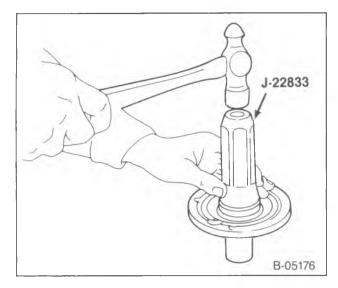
Installing the Drive Gear Bearing Retainer Oil Seal
